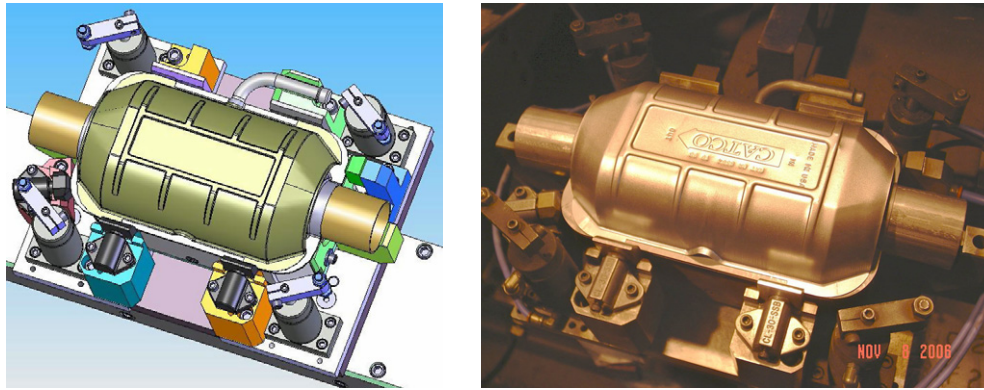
Robot weld fixture (IMPROVE solutions LLC.) [23].
